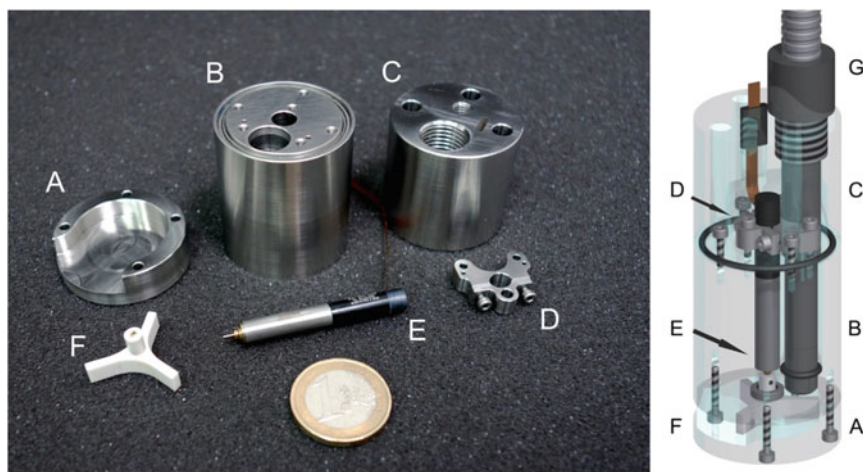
Left: Components of disassembled probe head for DLS measurements in stirred solutions. 1€-coin is shown for size reference. Right: CAD image of assembled probe head with DLS measurement probe. Photo, CAD drawing: Fraunhofer ILT
